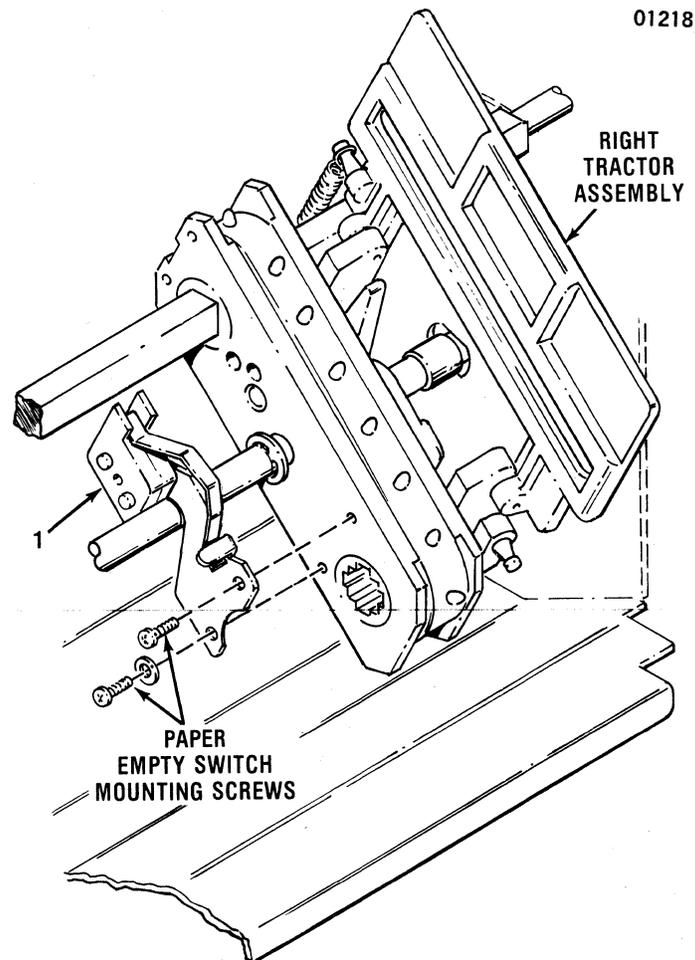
REMOVAL/REPLACEMENT, PAPER EMPTY SWITCH
